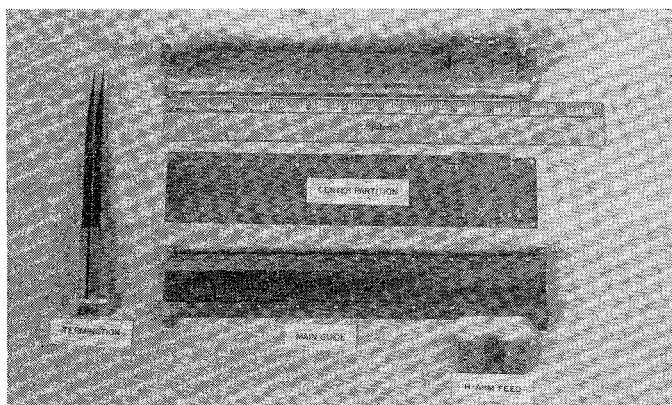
E* plane forked hybrid T test fixture, disassembled.
